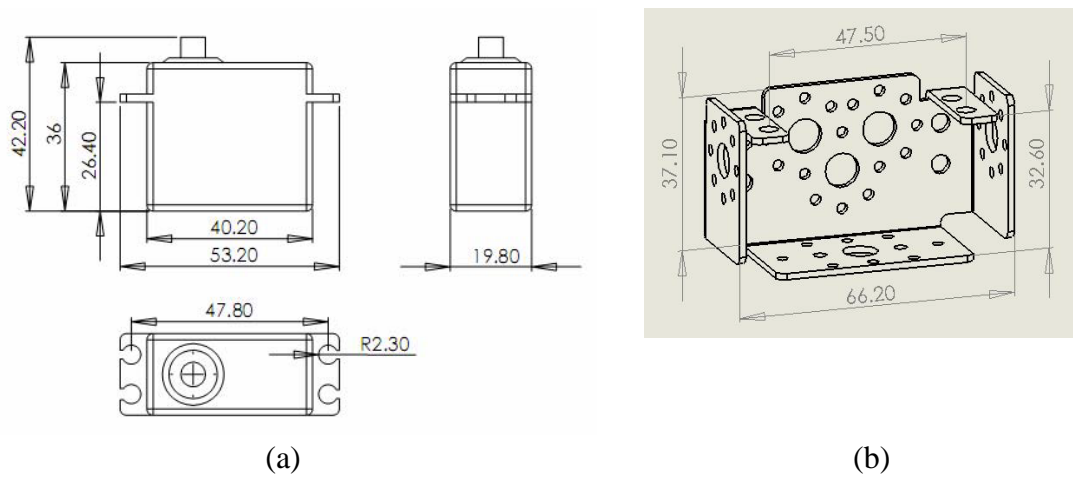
(a) C36R and (b) Holder Dimension Drawing
